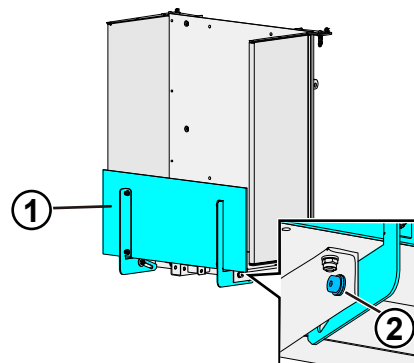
Guide Rail Support Assembly (on Flat Roof)
